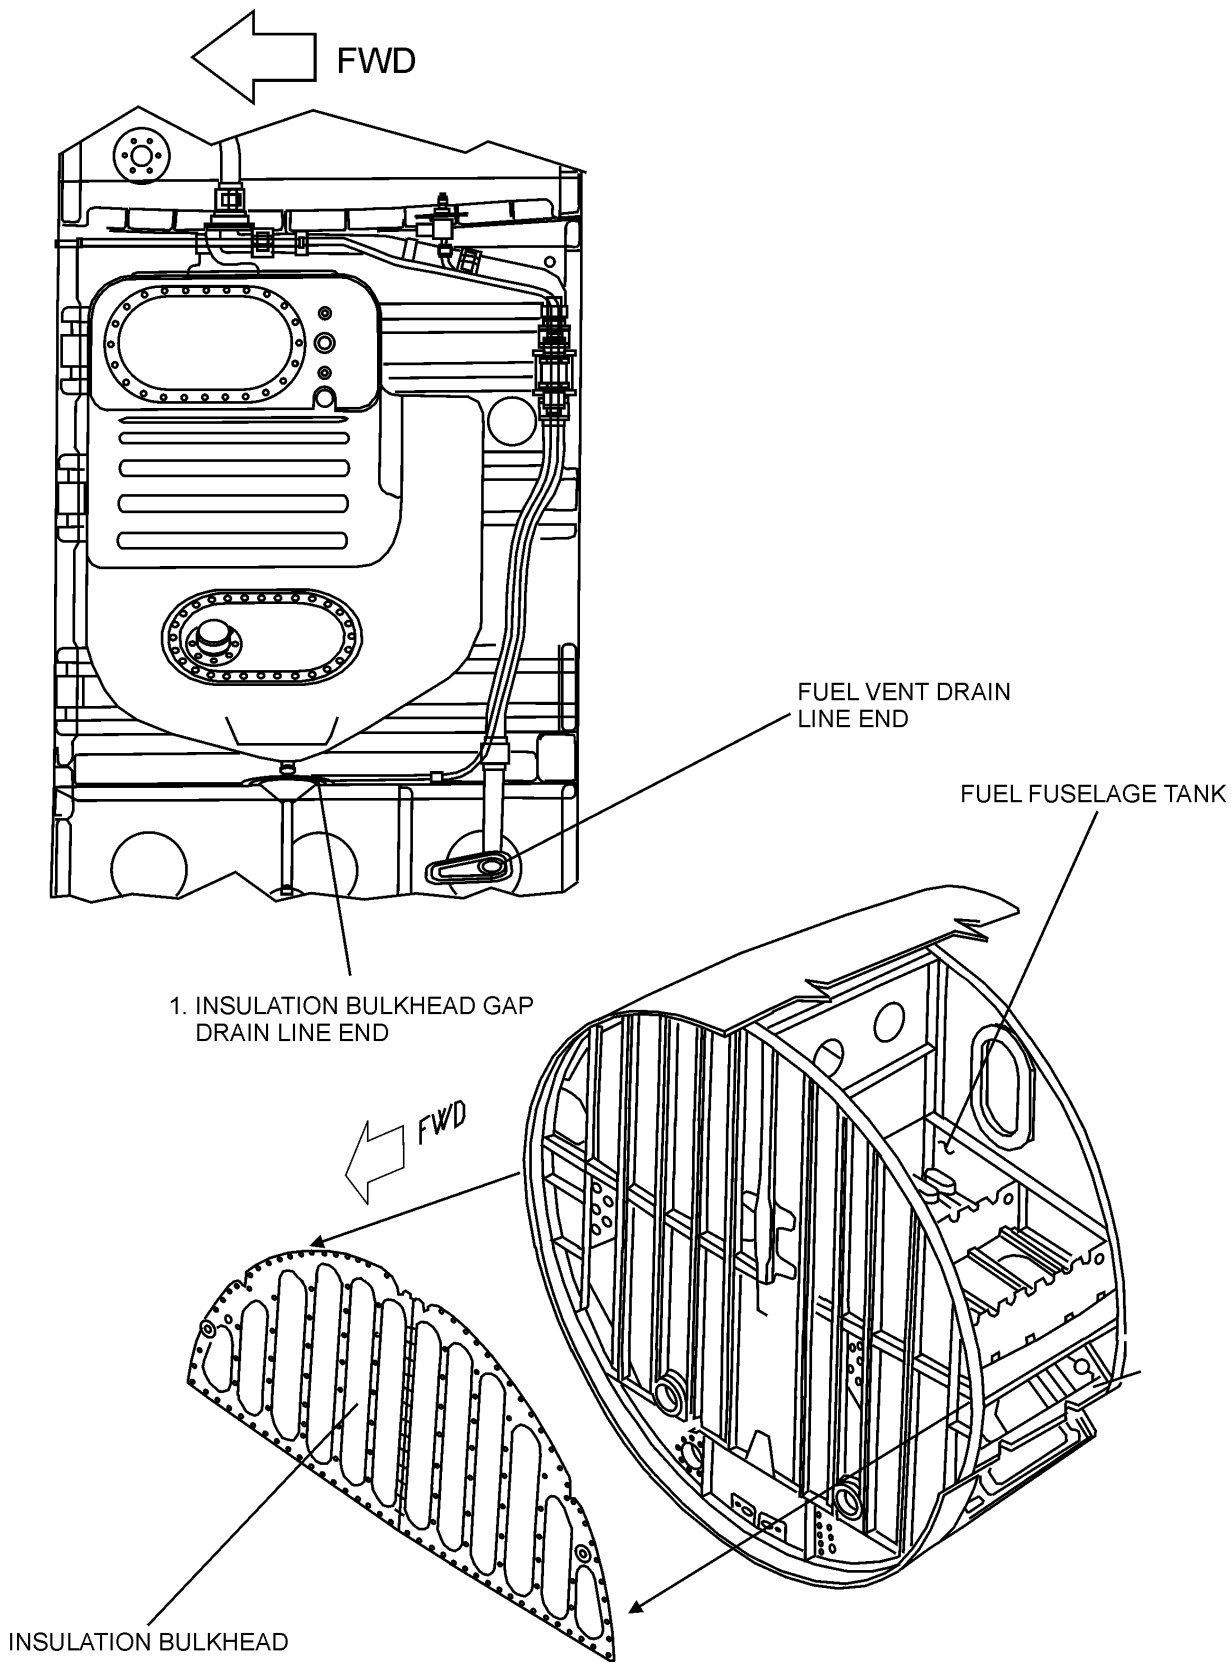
Fuel Fuselage Tank 6000 Bulkhead - Leakage Check (Sheet 1 of 2)
